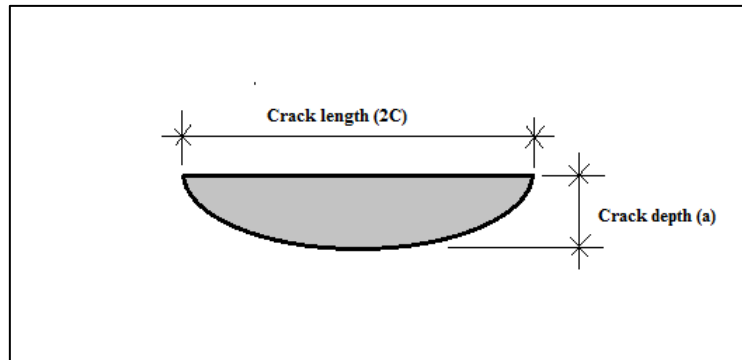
Geometry of crack implemented in 4-point bend specimens
